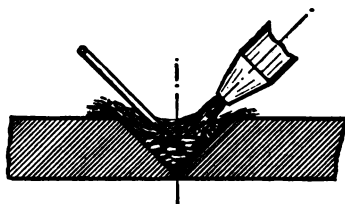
Method of stirring the molten metal with the filling bar during the welding operation to destroy the films of oxide.
